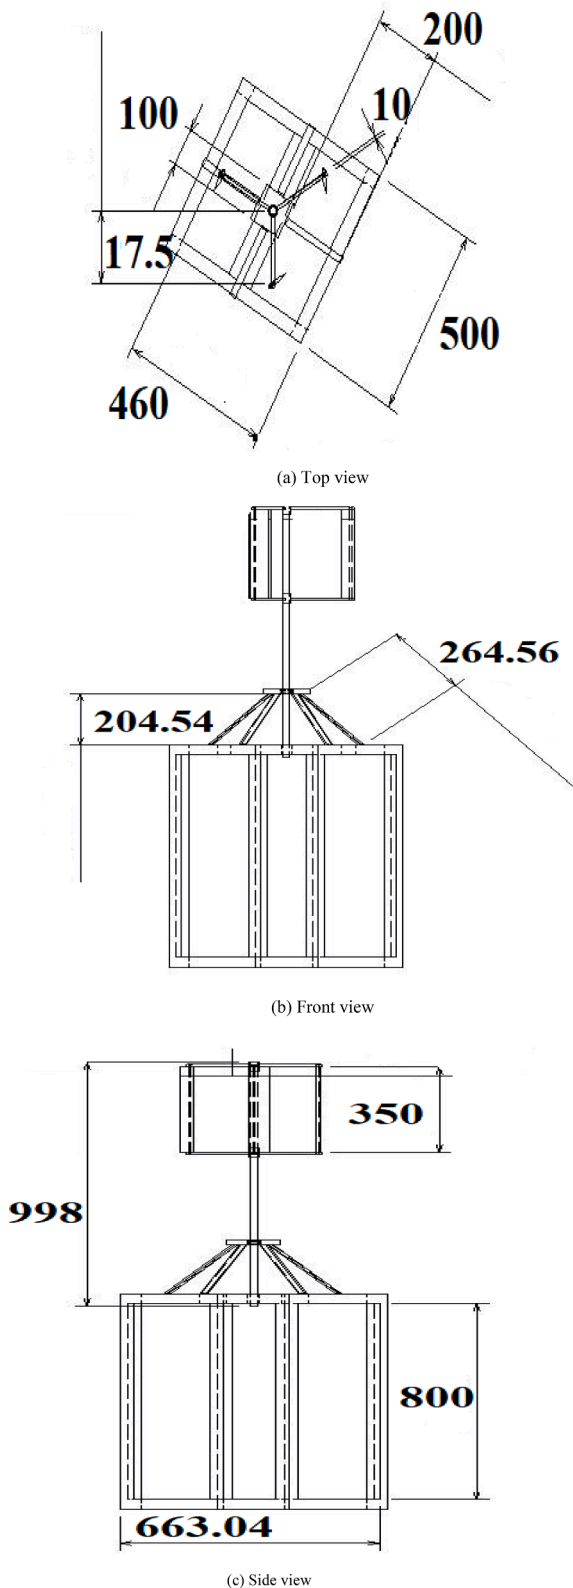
Blade geometry (CAD drawing) from three views: (a) top, (b) front, and (c) side.
